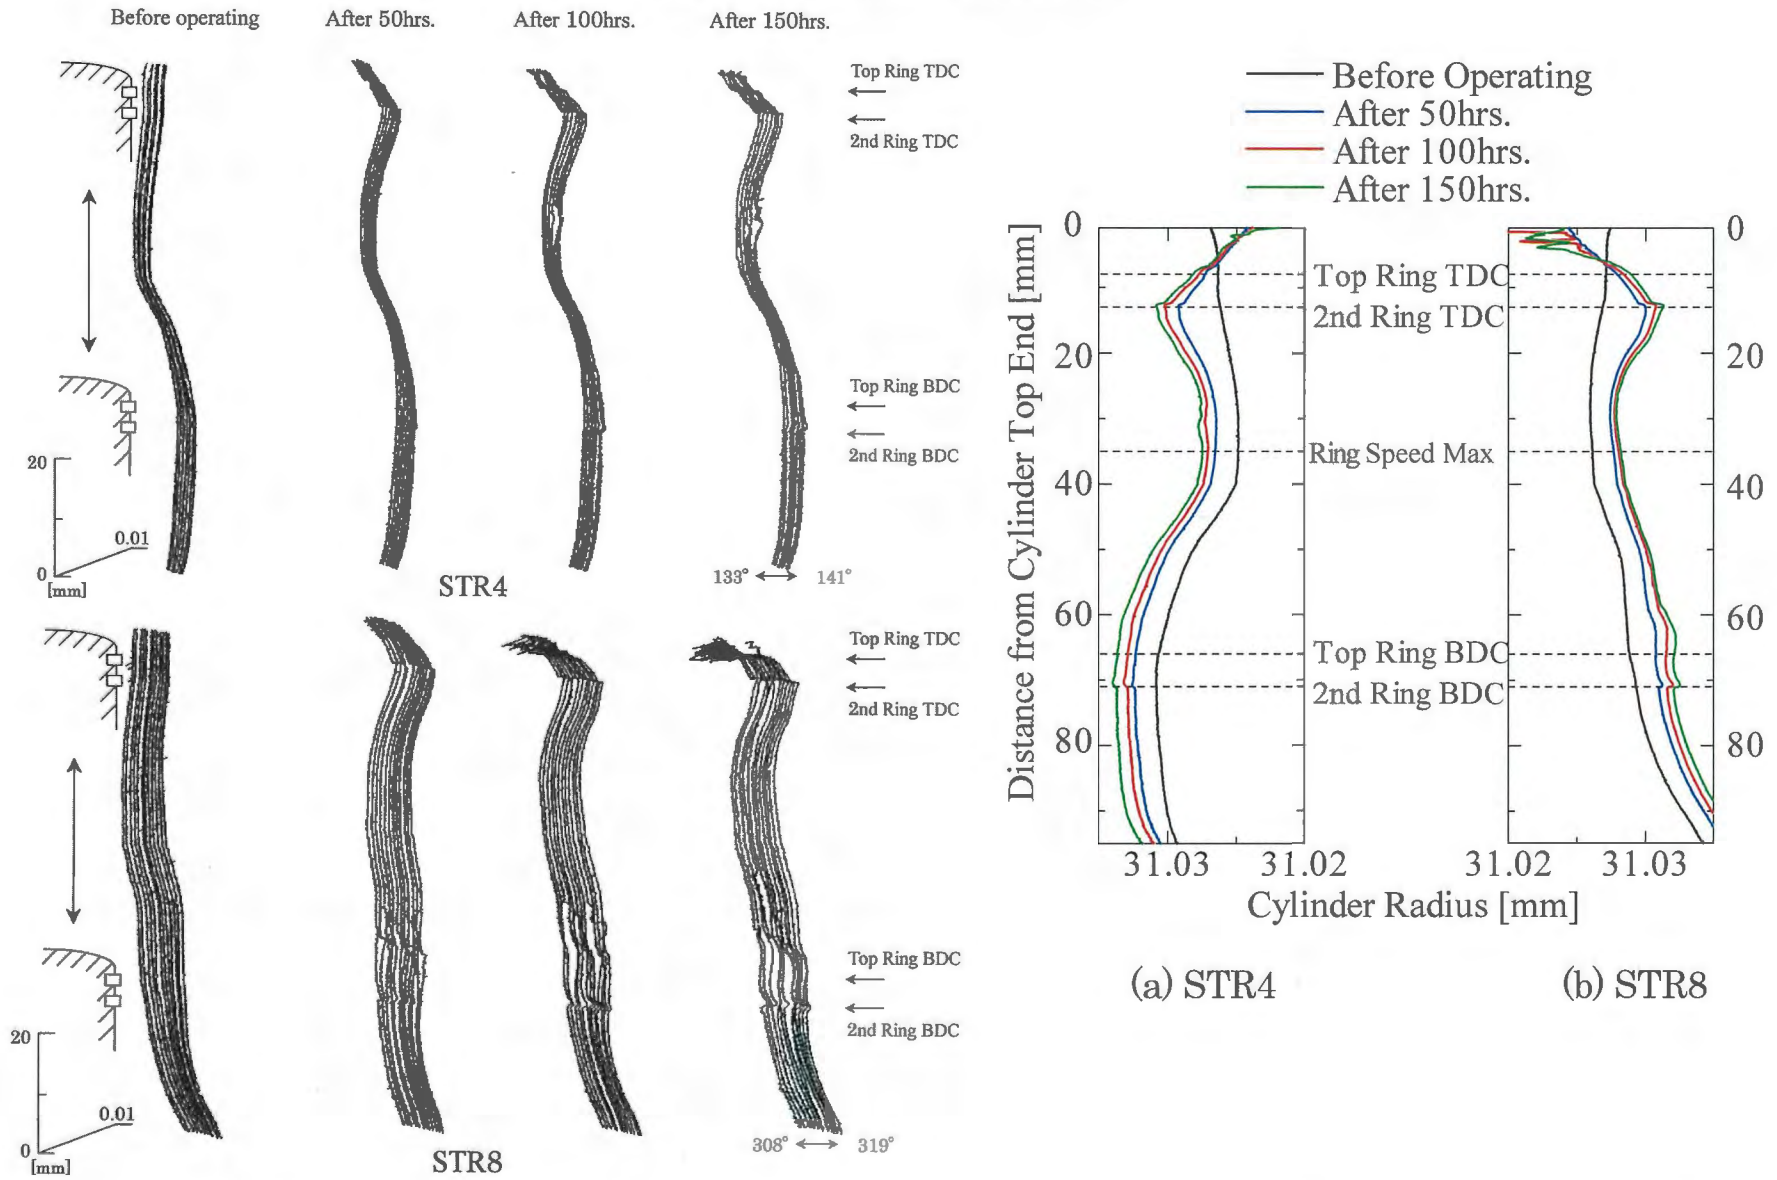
(d) The three dimensional and plane form of cylinder G2 at STR4 and STR8
